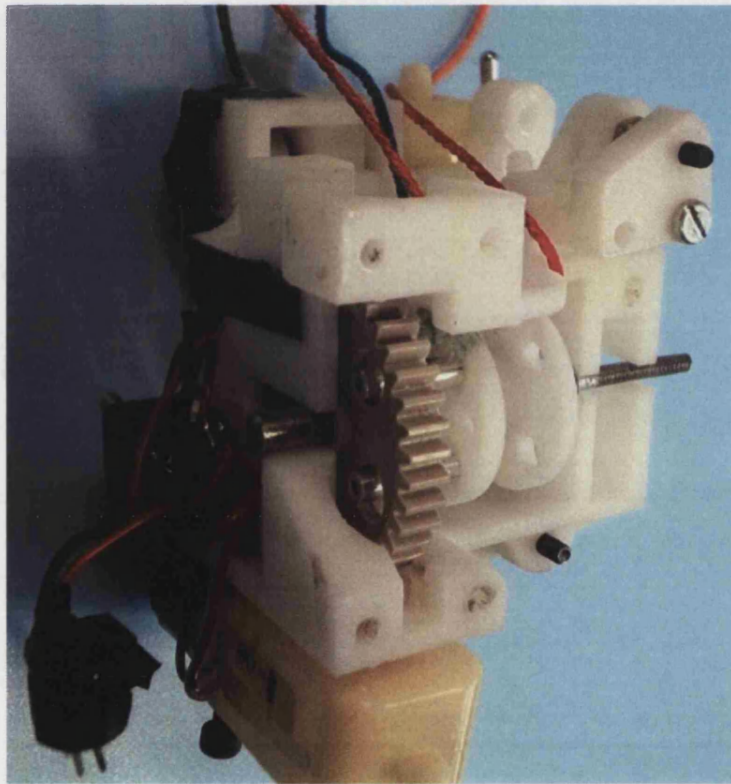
View of control box with worm shaft assembly removed to reveal the slots that make it possible to slide in the pre-assembled capstan shaft (including drive gear).
